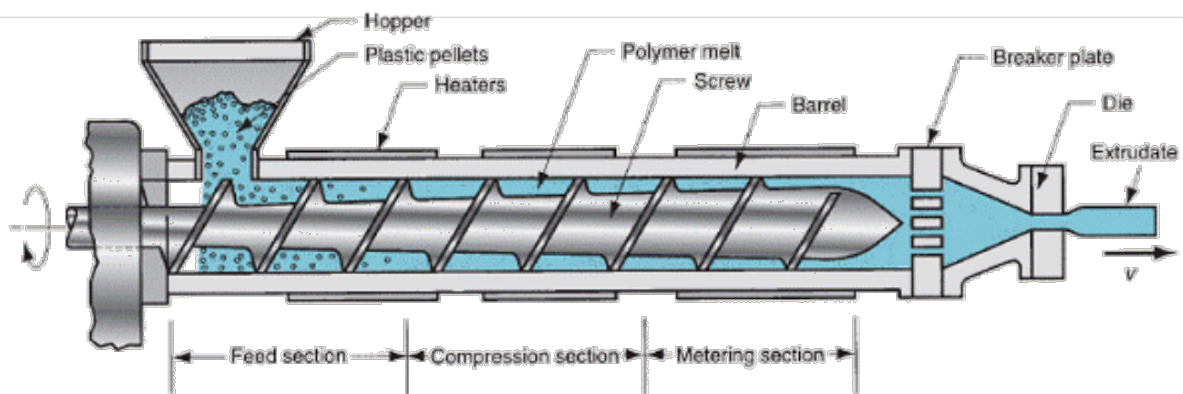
Representation of a screw extruder for WHAM systems (Courtesy of Ingersoll Machine Tools)
